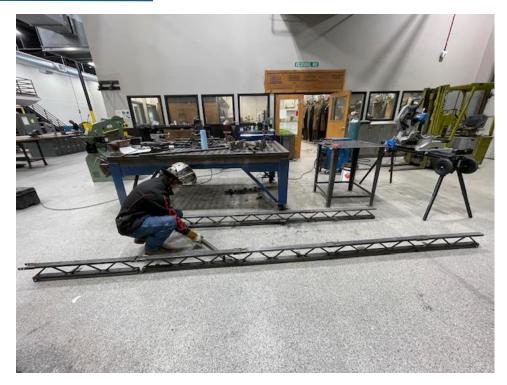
, Flag High Student Welding the Bridge [11]
